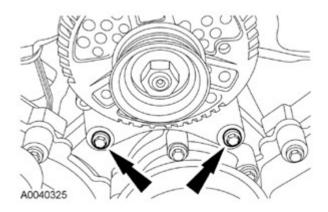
Locating Generator Lower Mounting Bolts Courtesy of FORD MOTOR CO.
